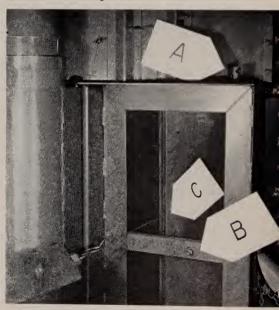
A view of the back side of a pressure plate, showing (A) the spring tension adjustment; (B) the spindle clearance adjustment; and (C) the equipment for method of determining the yield pressure.
